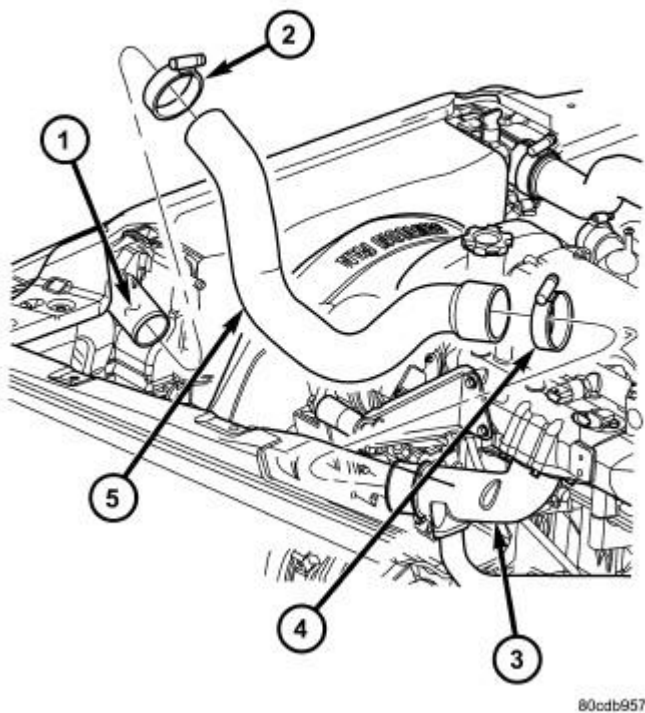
CHARGE AIR COOLER OUTLET HOSE
